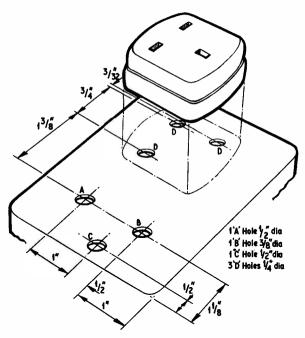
Position of controls and socket on the die-cast box. Location of feed-through holes (D) will depend on the design and type of socket. Hole C is only needed when a separate fuse is fitted
